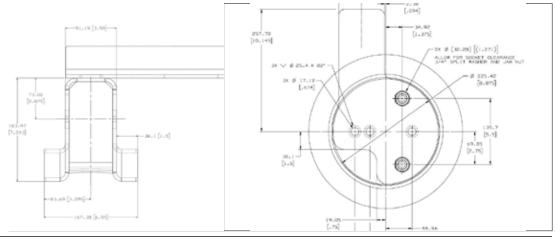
WELD-ON TRAILER MOUNTING DETAIL (SEE SECTION 14 FOR LARGER IMAGES)
